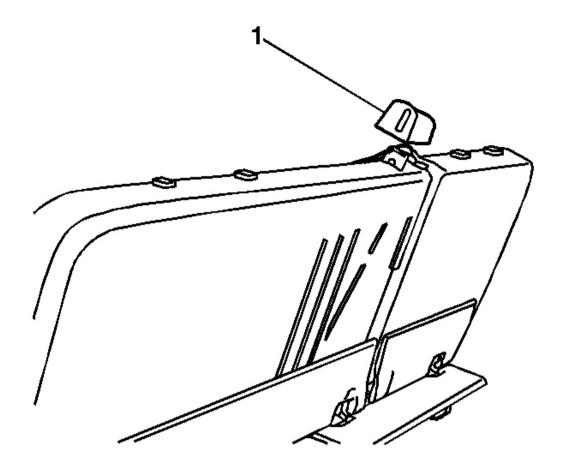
Seat Belt Guide Cover Courtesy of GENERAL MOTORS CORP.
